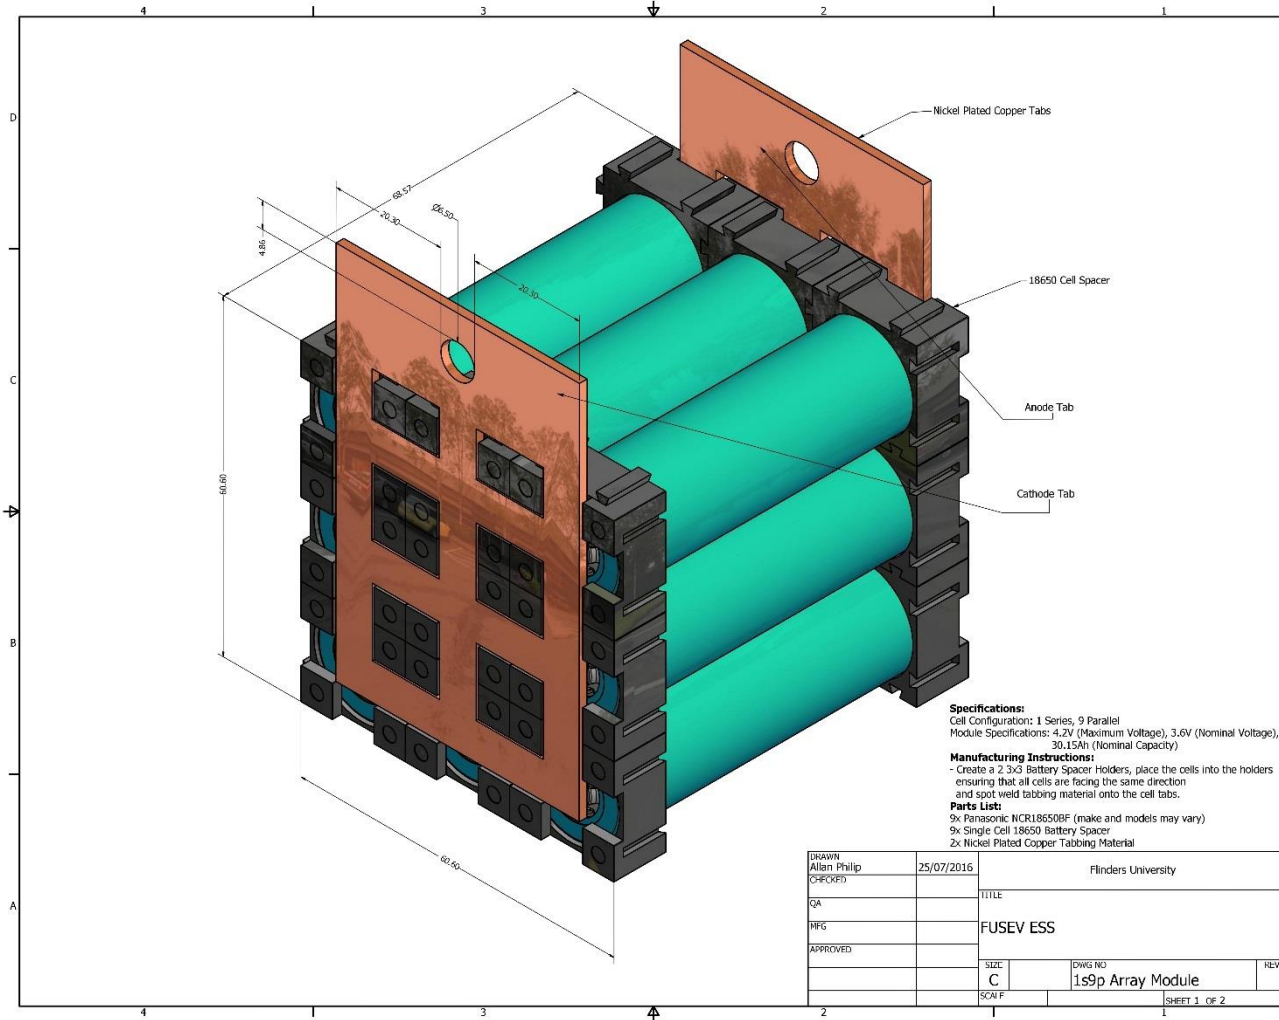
The mechanical drawing of the FUSEV's 1s9p battery module.
